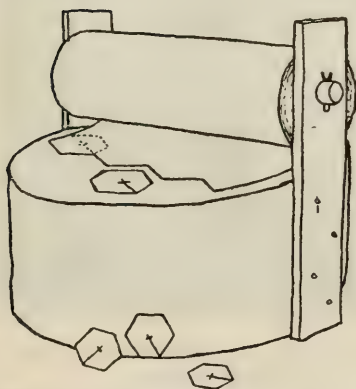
CUTTING BLOCK AND PAPER IN POSITION FOR MAKING TAR PADS.
